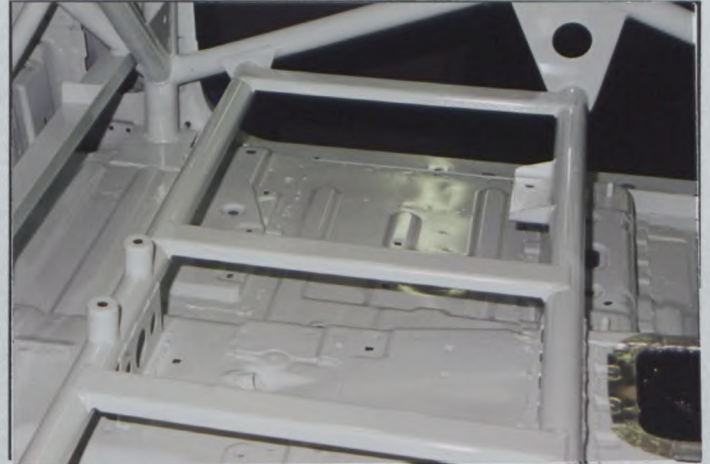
SEAT BRACKET AND LONGITUDINAL
